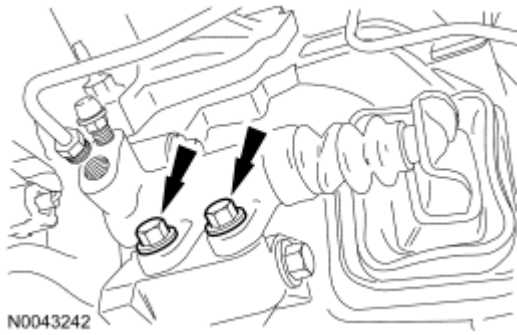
Identifying Clutch Slave Cylinder Bolts
